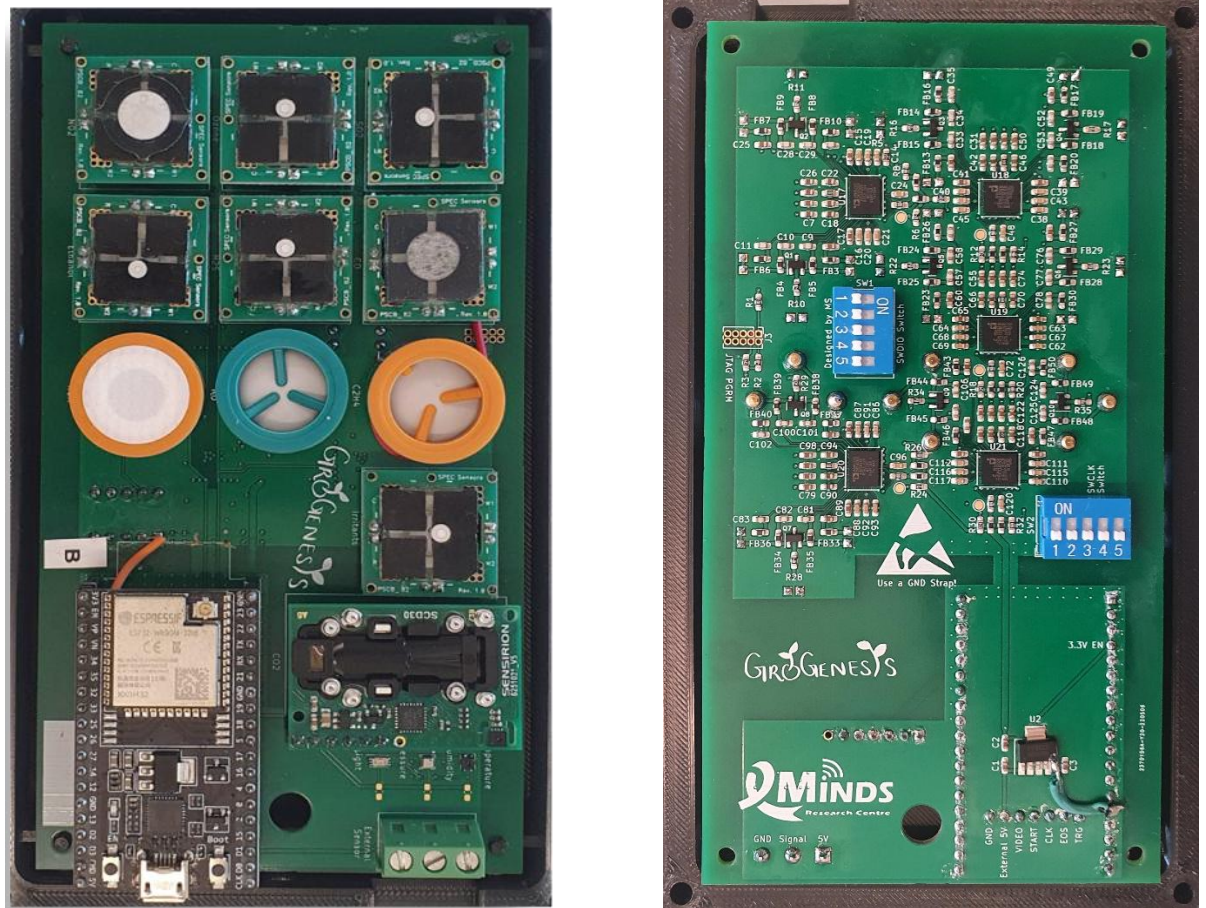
Top view (left) and bottom view (right) of fabricated GroGenesis v2 PCB
